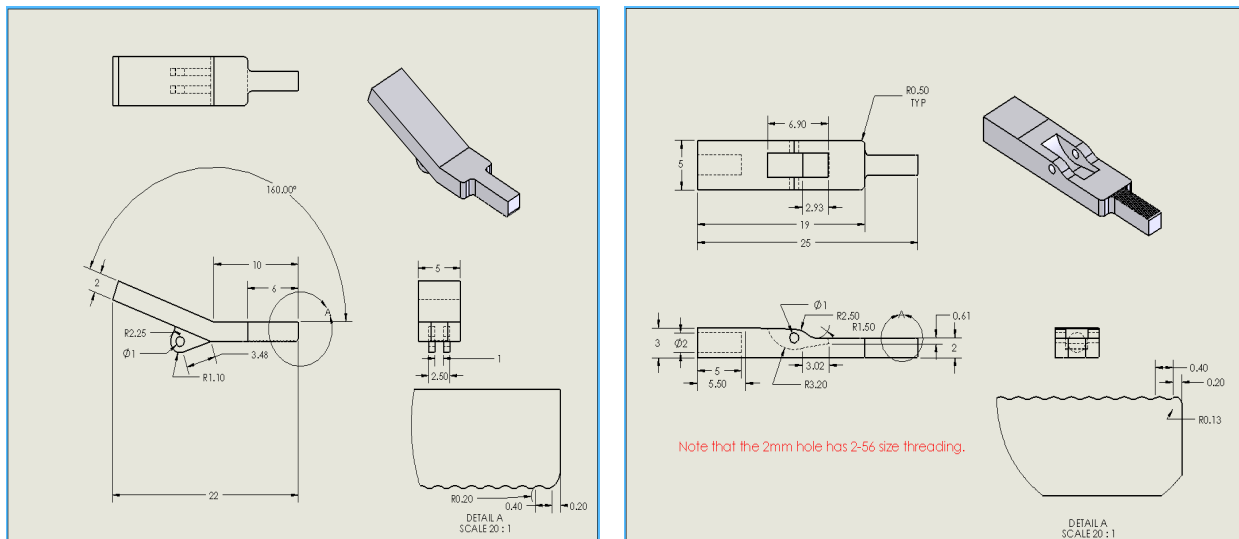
Titanium nano-tensile tester specimen clamp. The device is spring loaded and also has a tightening screw to finger-tighten the specimen. 1000 grit sand paper is super glued to clamping surface, providing positive grabbing surface without crushing the fiber specimen.
